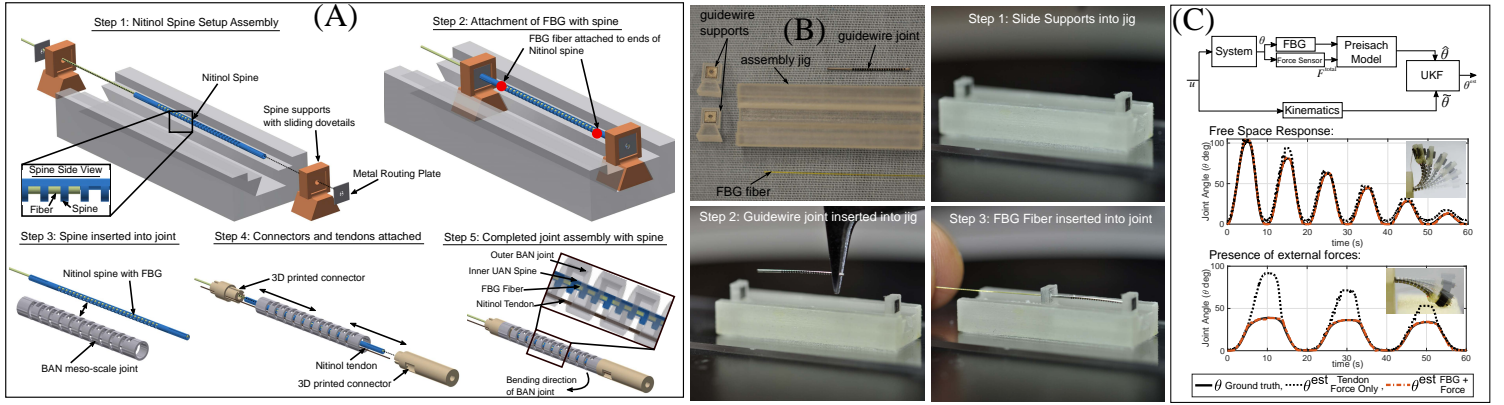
Fiber Bragg grating based sensing assembly to sense shape of micro/meso-scale continuum robots: (A) Design of proposed sensing assembly in meso-scale robot; (B) Design of proposed sensing assembly in micro-scale robot; (C) Preisach model for hysteresis with unscented Kalman filter demonstrates excellent tracking in free-space and external forces.
